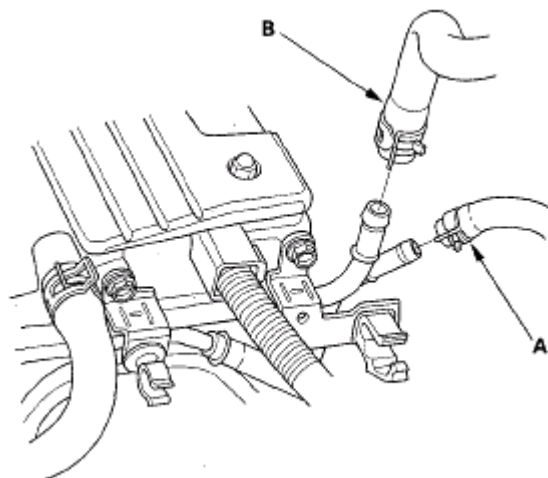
Identifying EVAP Canister Hose & Brake Booster Vacuum Hose
